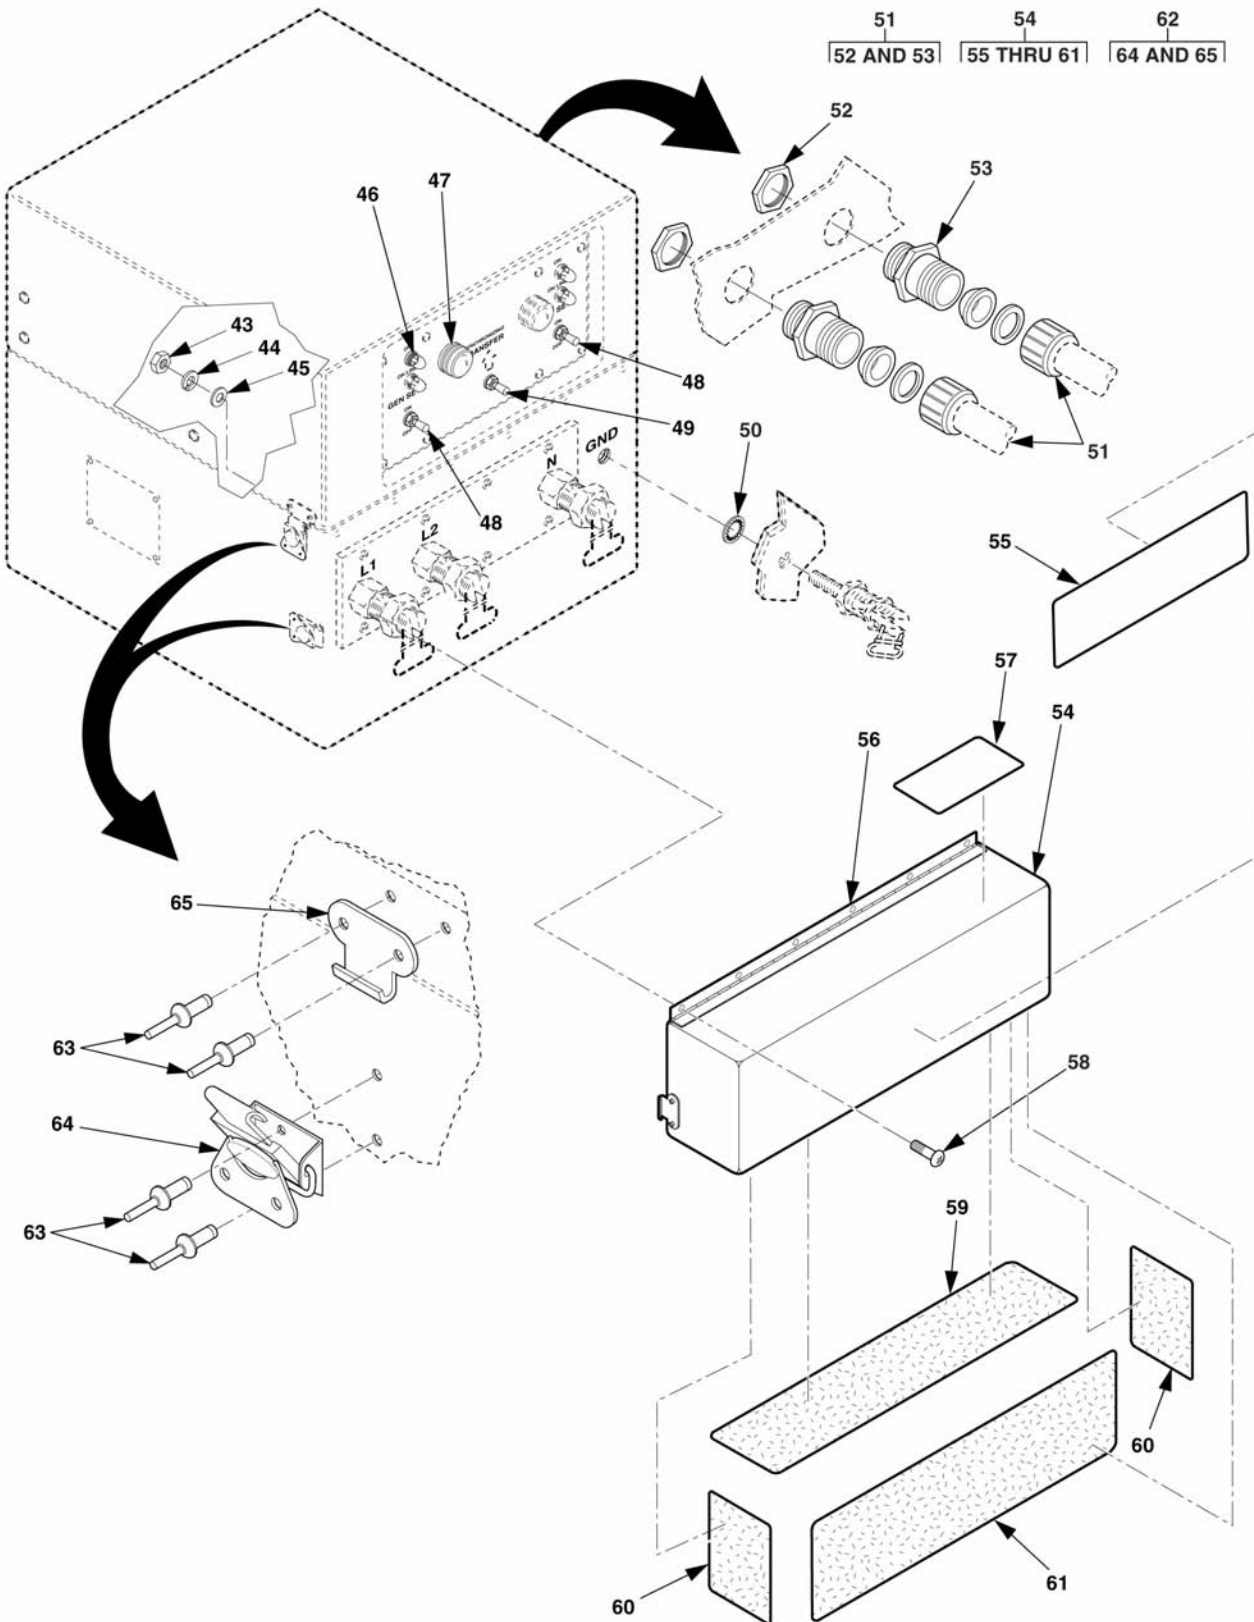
Switch/Box Assembly, 97403 13230E6950 (Sheet 3 of 3)
